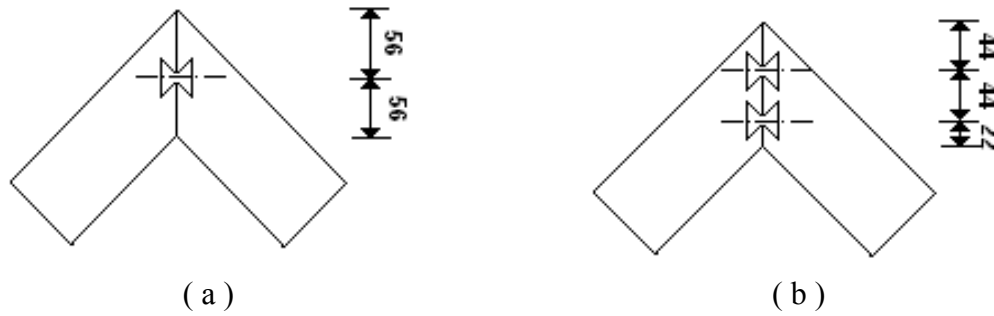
Formats of single and double dovetail joints. The measurements are in mm.
